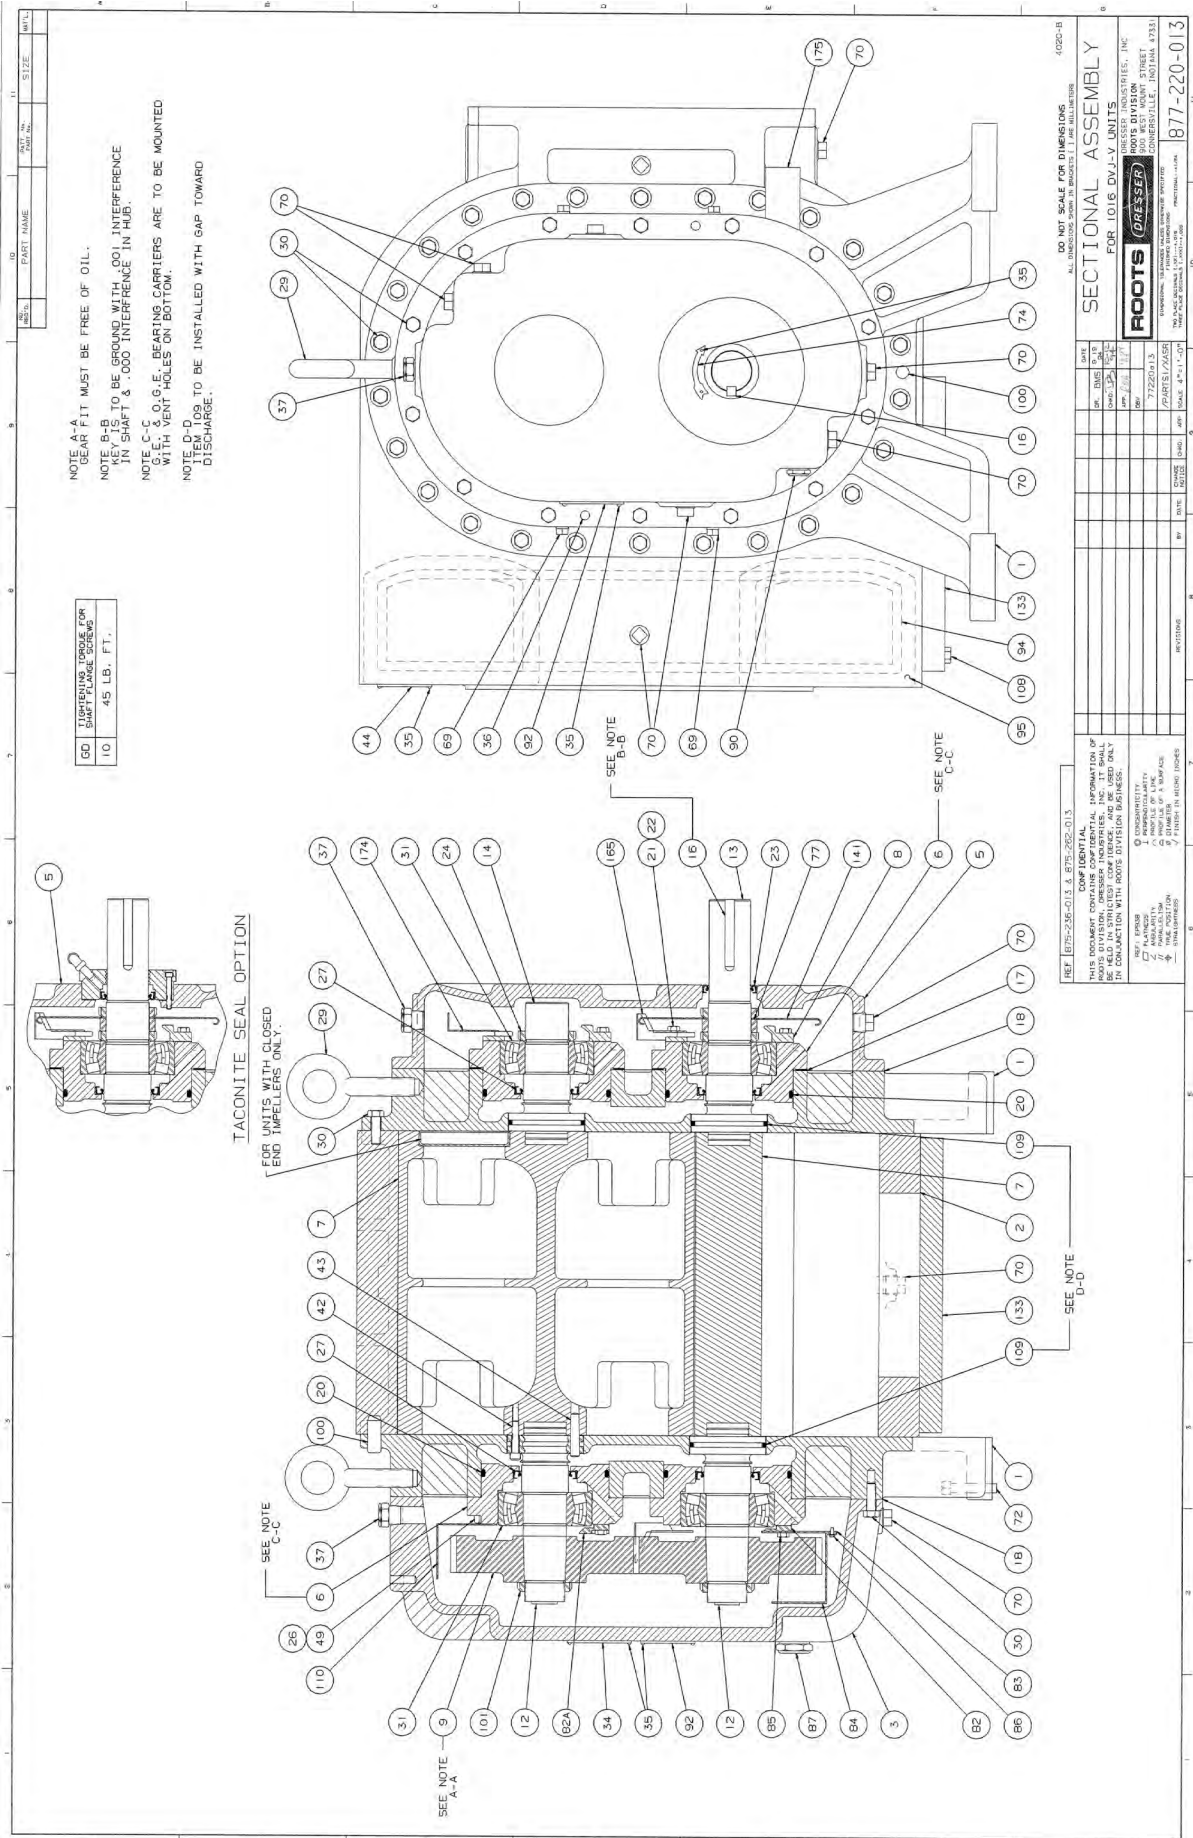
Sectional Assembly of 1016 DVJ-V Units
